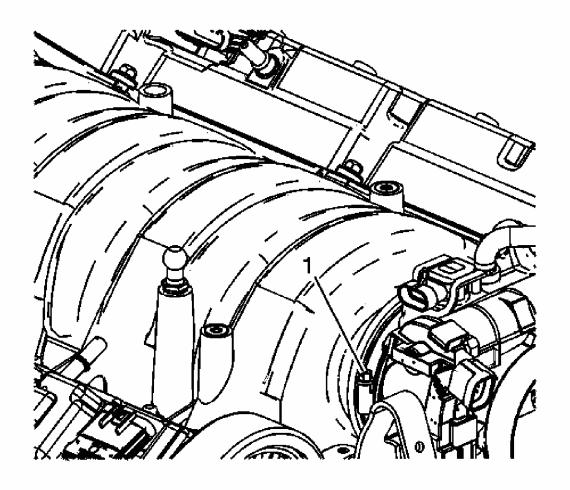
Locating Plenum Duct Clamp Courtesy of GENERAL MOTORS CORP.
